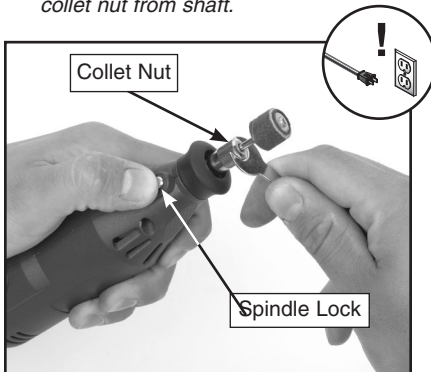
Loosening collet nut by pressing spindle lock and turning Counterclockwise w/wrench.
